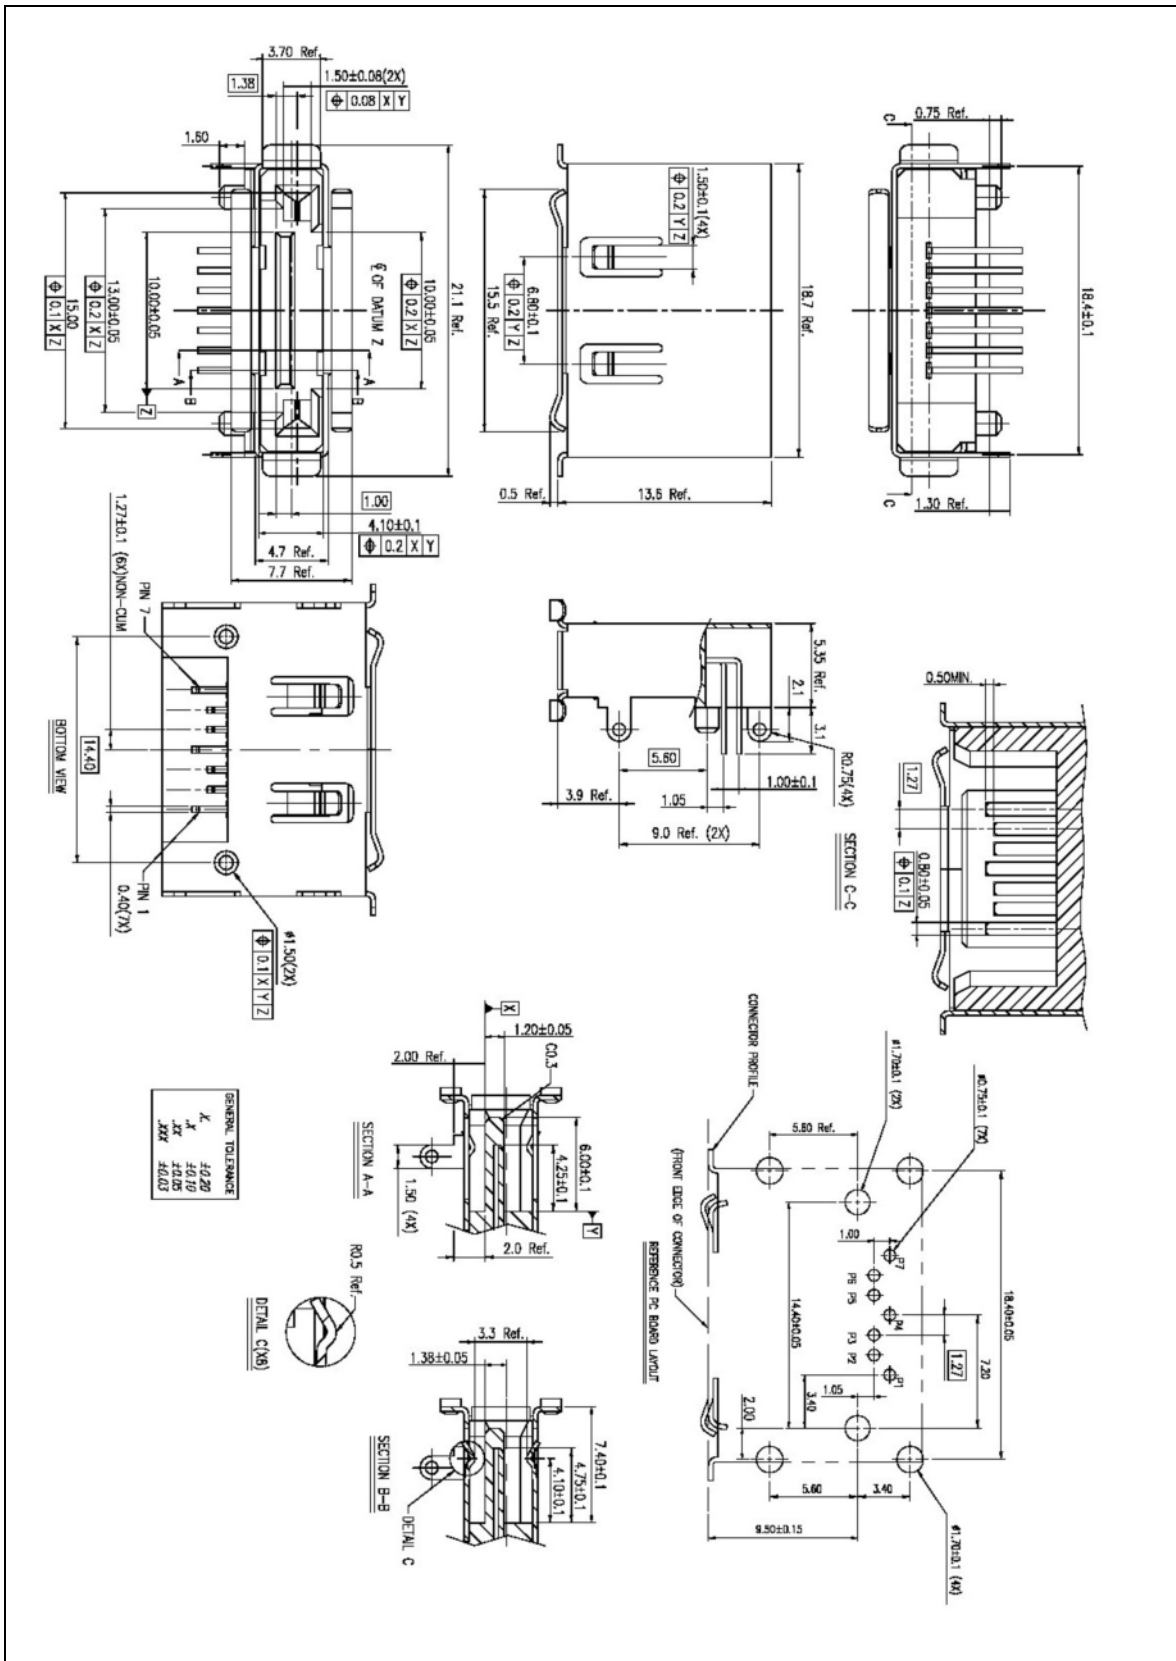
Mechanical dimensions of External Serial ATA RA Through-hole
